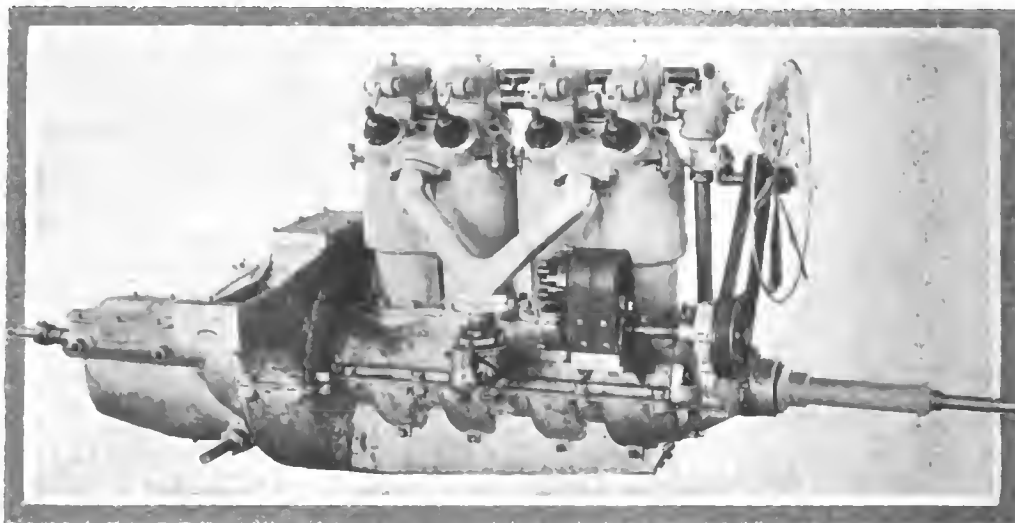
Model 40 motor looking at intake side, showing carburetor, magneto, fan and cranking extension
